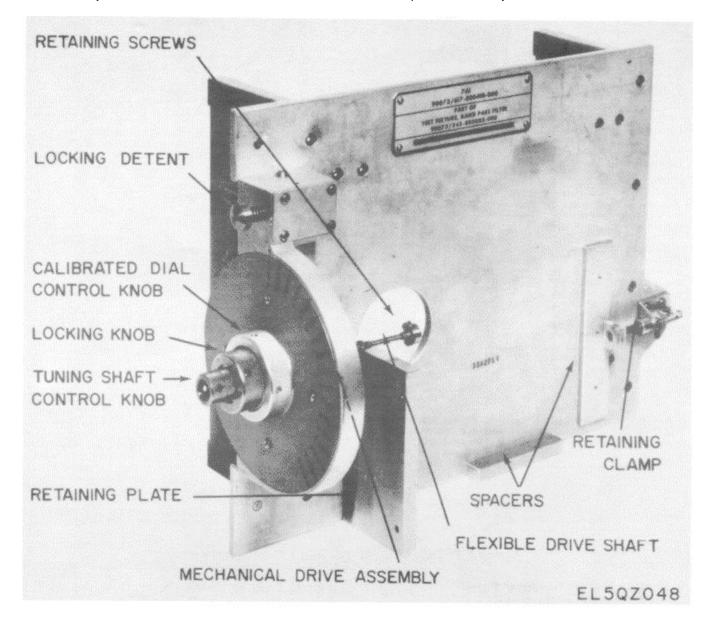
Bandpass Filter Test Fixture TS-3825(V)/GRM-95(V)2.
